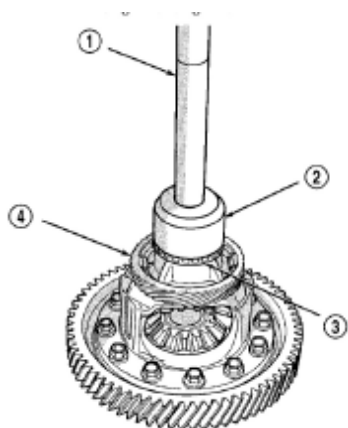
Installing differential bearing taper sleeve around differential casing
